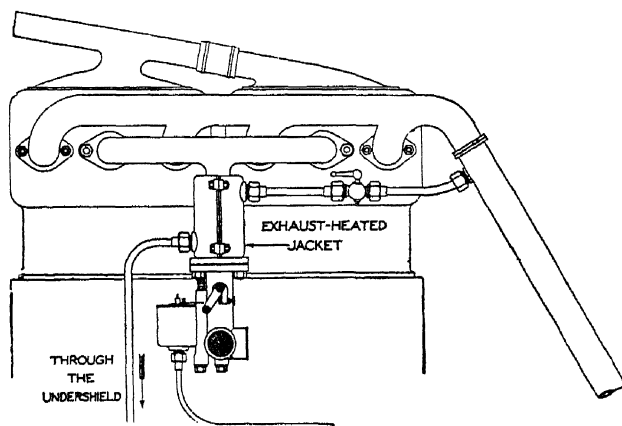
Exhaust Jacketed Inlet Manifold Method of Heating.
